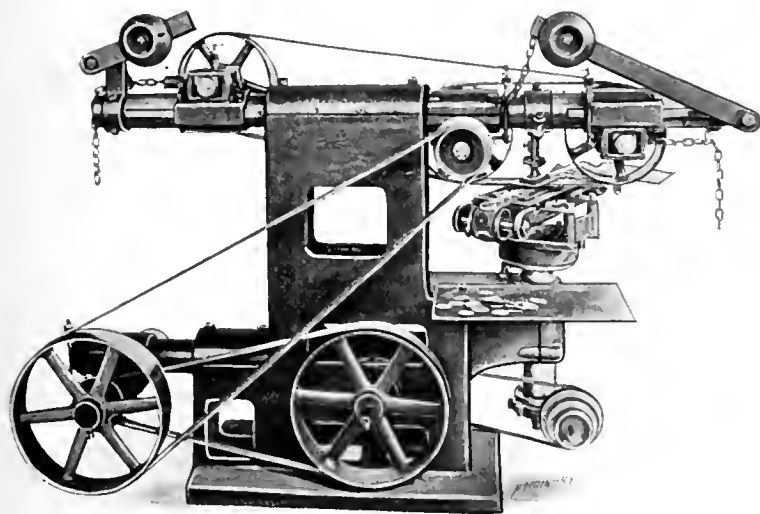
Rear View of Machine, showing Drive and Tension Mechanism
